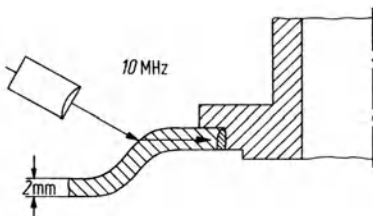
Testing of a laser-beam welded seam
